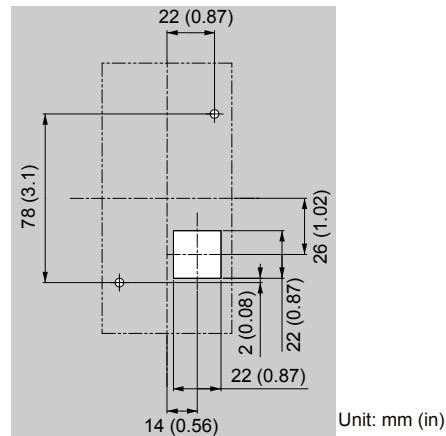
Panel Cut-Out Dimensions (External/Face-Mount Installation)
